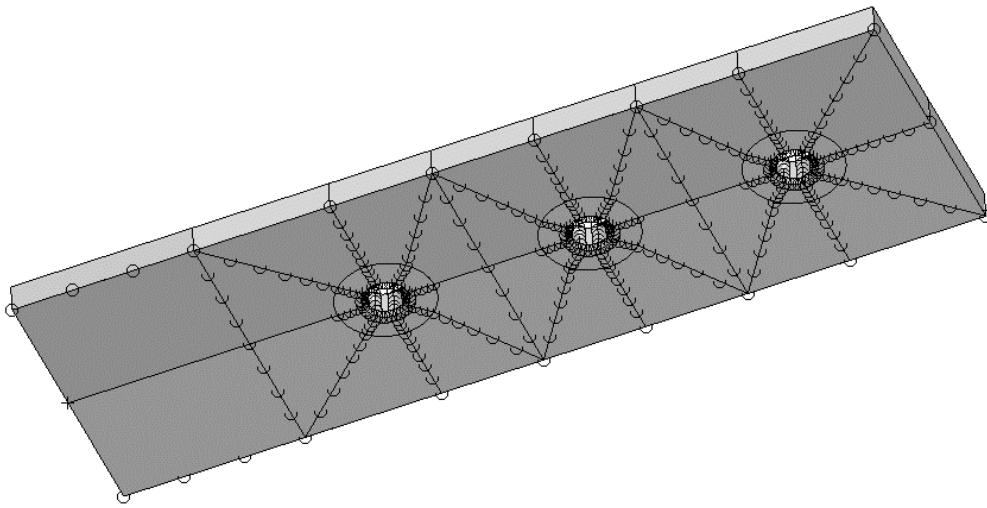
Mesh seeds on upper plate (three bolt, protruding head)
